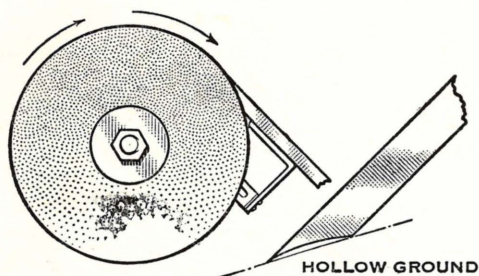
The bevel of the plane blade is hollow ground on the surface of the grinding wheel. This makes honing easier
